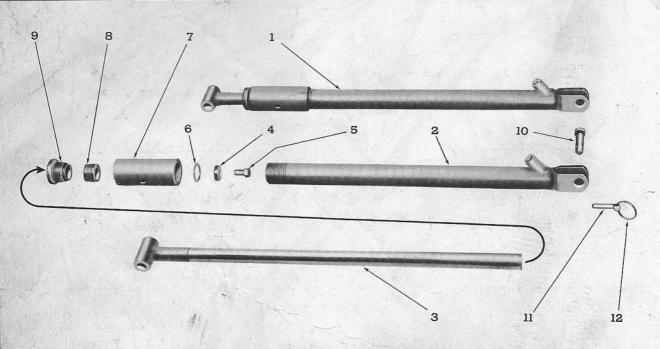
Cylinder Assembly, Lift Arm, for Model 19-7 (Prior)
